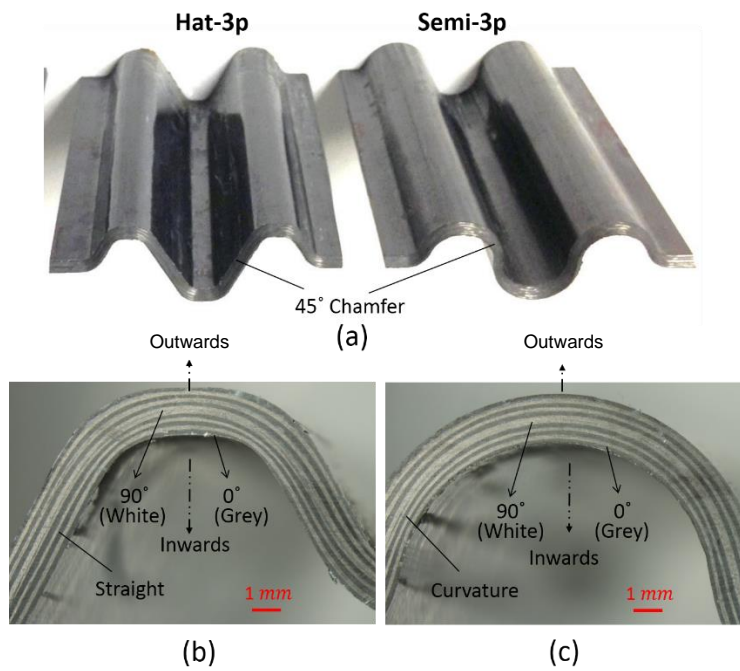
(a) Test specimens with chamfer triggers; Optical microscopy of cross-section of (b) hat specimen and (c) semi-circular specimen.
